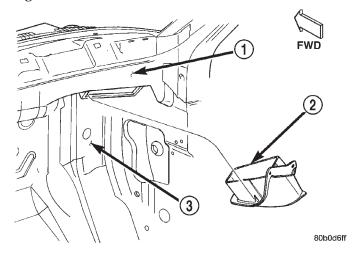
Heater-A/C Housing Plenum Adapter Remove/Install
